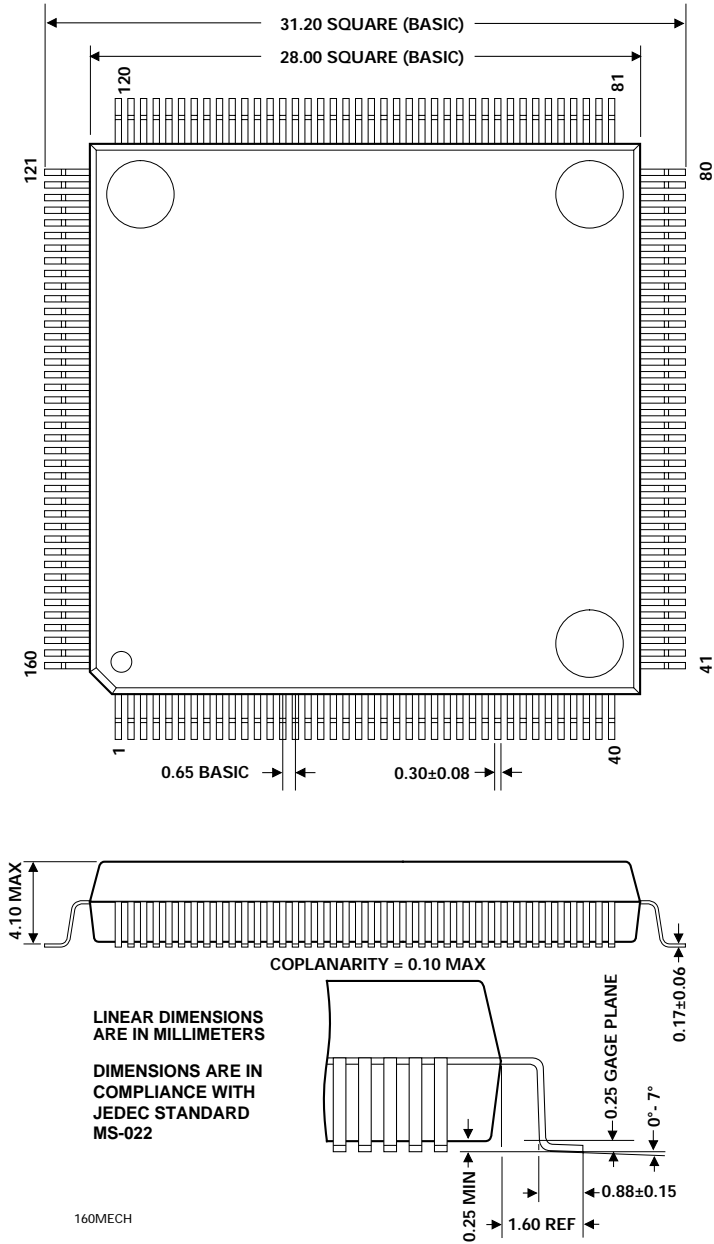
160-pin PQFP Mechanical Dimensions
